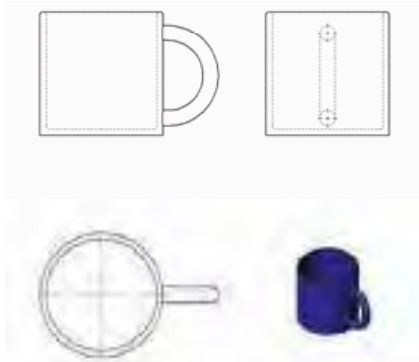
First angle projection drawing of a Tea Cup
